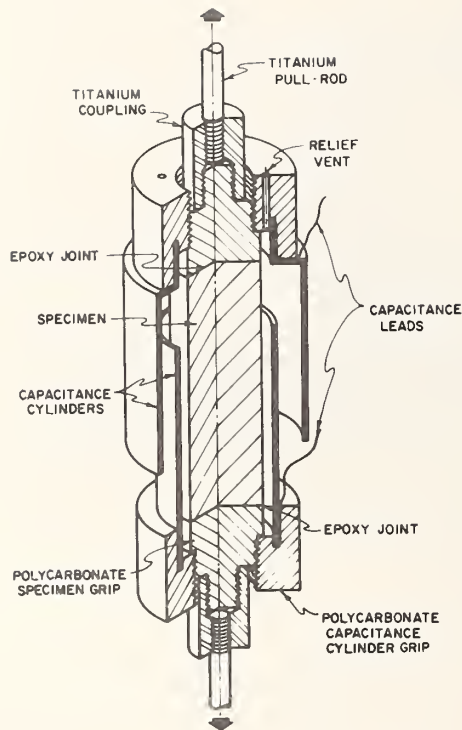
Capacitance extensometer assembly for foam specimen testing.
